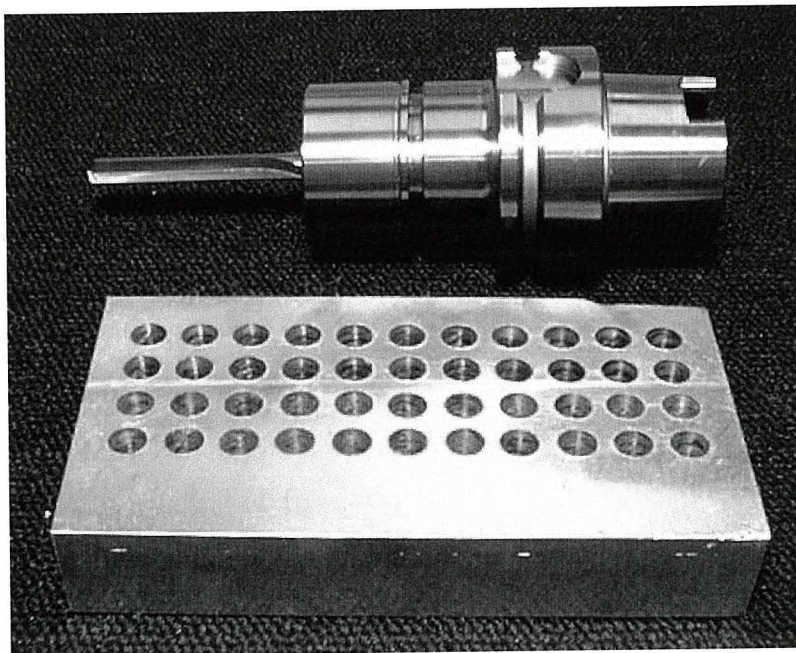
Drill for high-speed cutting of aluminum alloy
